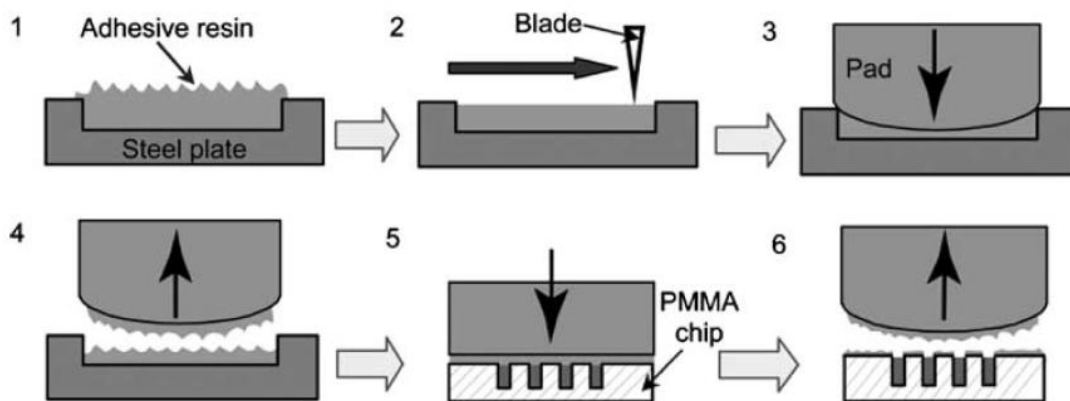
Adhesive application using a contact printing process. Adhesive was poured on steel plate with a having hole inside and spread over the plate using a blade (step 1, 2). Adhesive was applied on the rubber pad (step 3, 4). The adhesive on the rubber pad was deposited on the PMMA chip, the adhesive thickness on PMMA chip was nearly one fourth of the hollow depth and excessive adhesive was removed by sacrificial channels (step 5, 6). [211].
